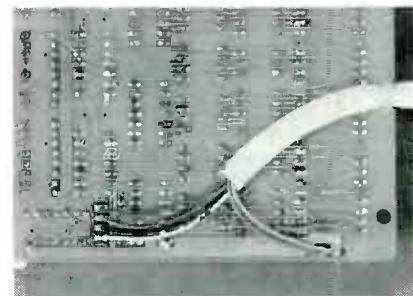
PHONE CABLE connections. Solder the wires directly to the foil side of the board.
